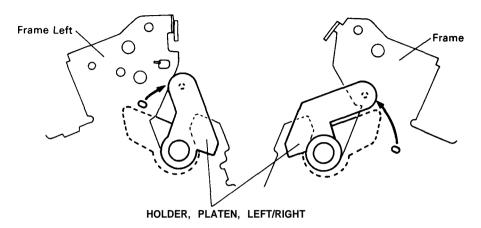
Disassembly of PLATEN ASSY. (2)
